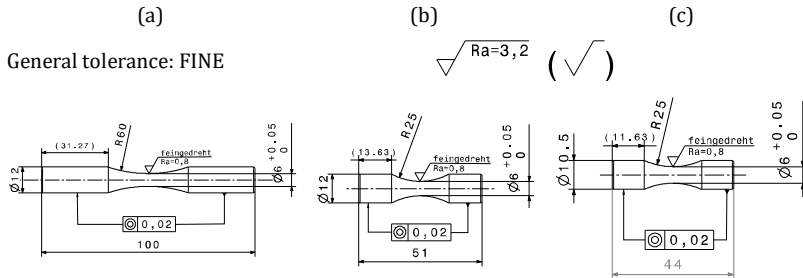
Rotating bending specimen, (a) RP01a - stud bolt, (b) RP02 - bearing bracket, (c) RP03 - bridge
